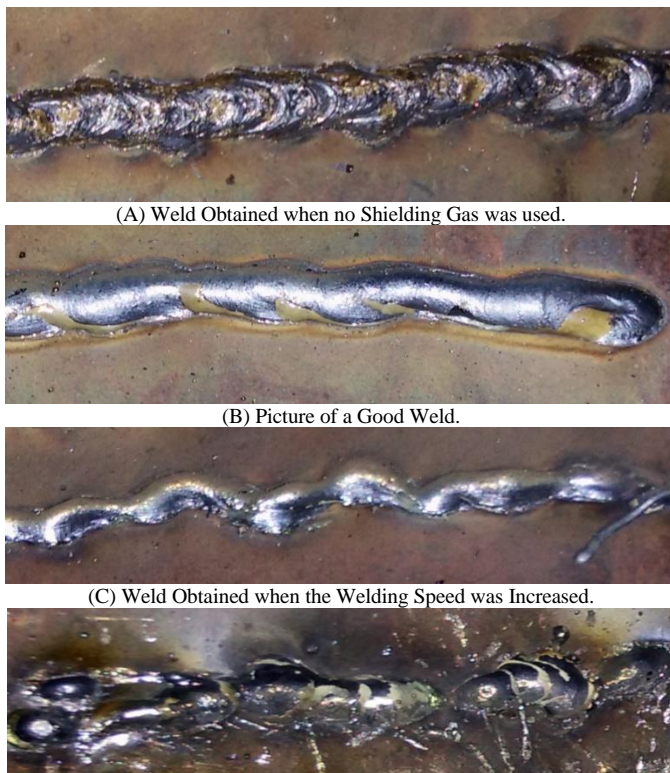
(D) Weld Obtained when the Wire Feed Rate is reduced.
